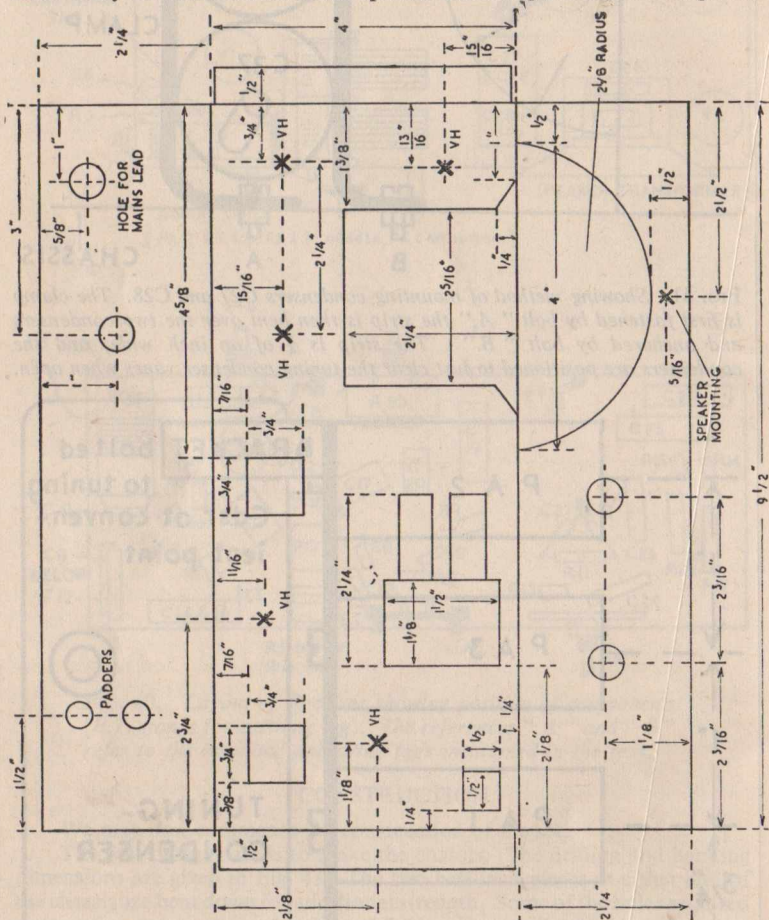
Drilling diagram of chassis before bending. Only centres of the valve-holder holes are shown (Marked "VH"). The complete holes are  $1\frac{1}{8}$  in. in diameter.
